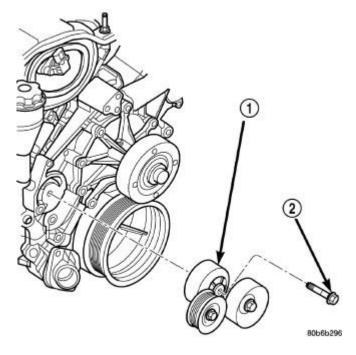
ACCESSORY DRIVE BELT TENSIONER Courtesy of CHRYSLER LLC
